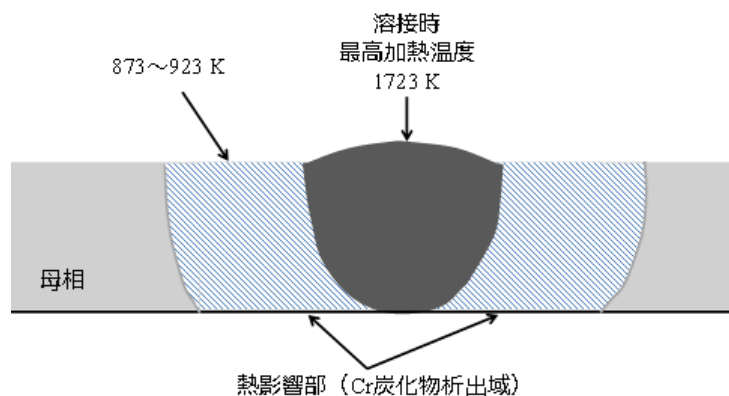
Schematic image of welded part in austenitic stainless steel
